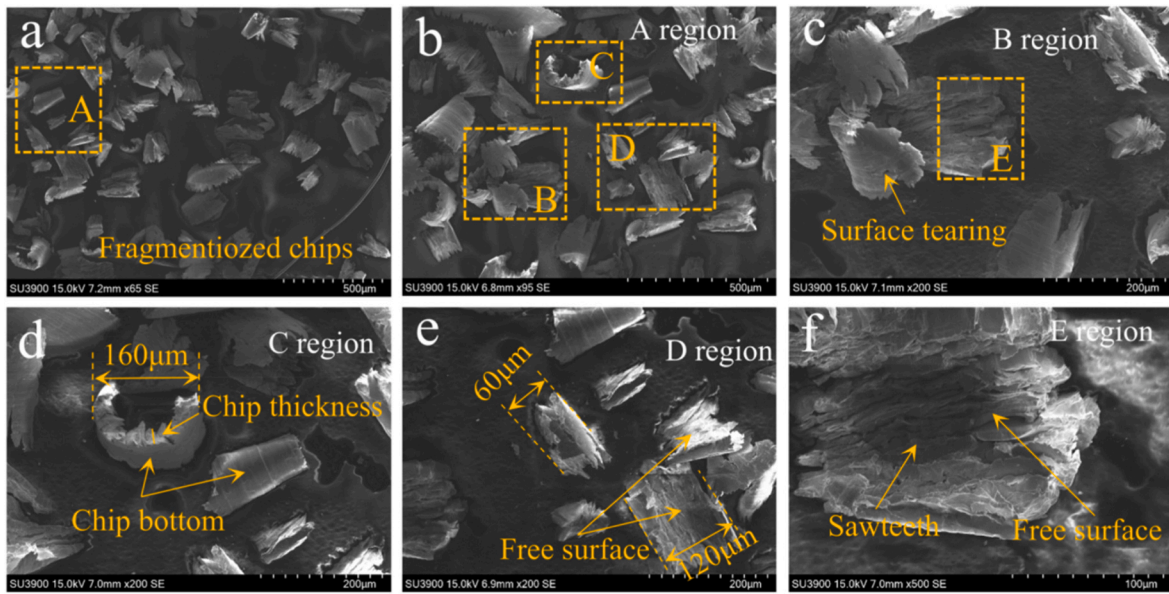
Chip morphology of CC: (a) Overview of chip morphology, (b) Partially enlarged view of (a), (c) Damage on the chip bottom and chip free surface, (d) cross section of chip morphology and chip bottom, (e) Chip length, (f) Chip free surface and partial sawtooth morphology.
